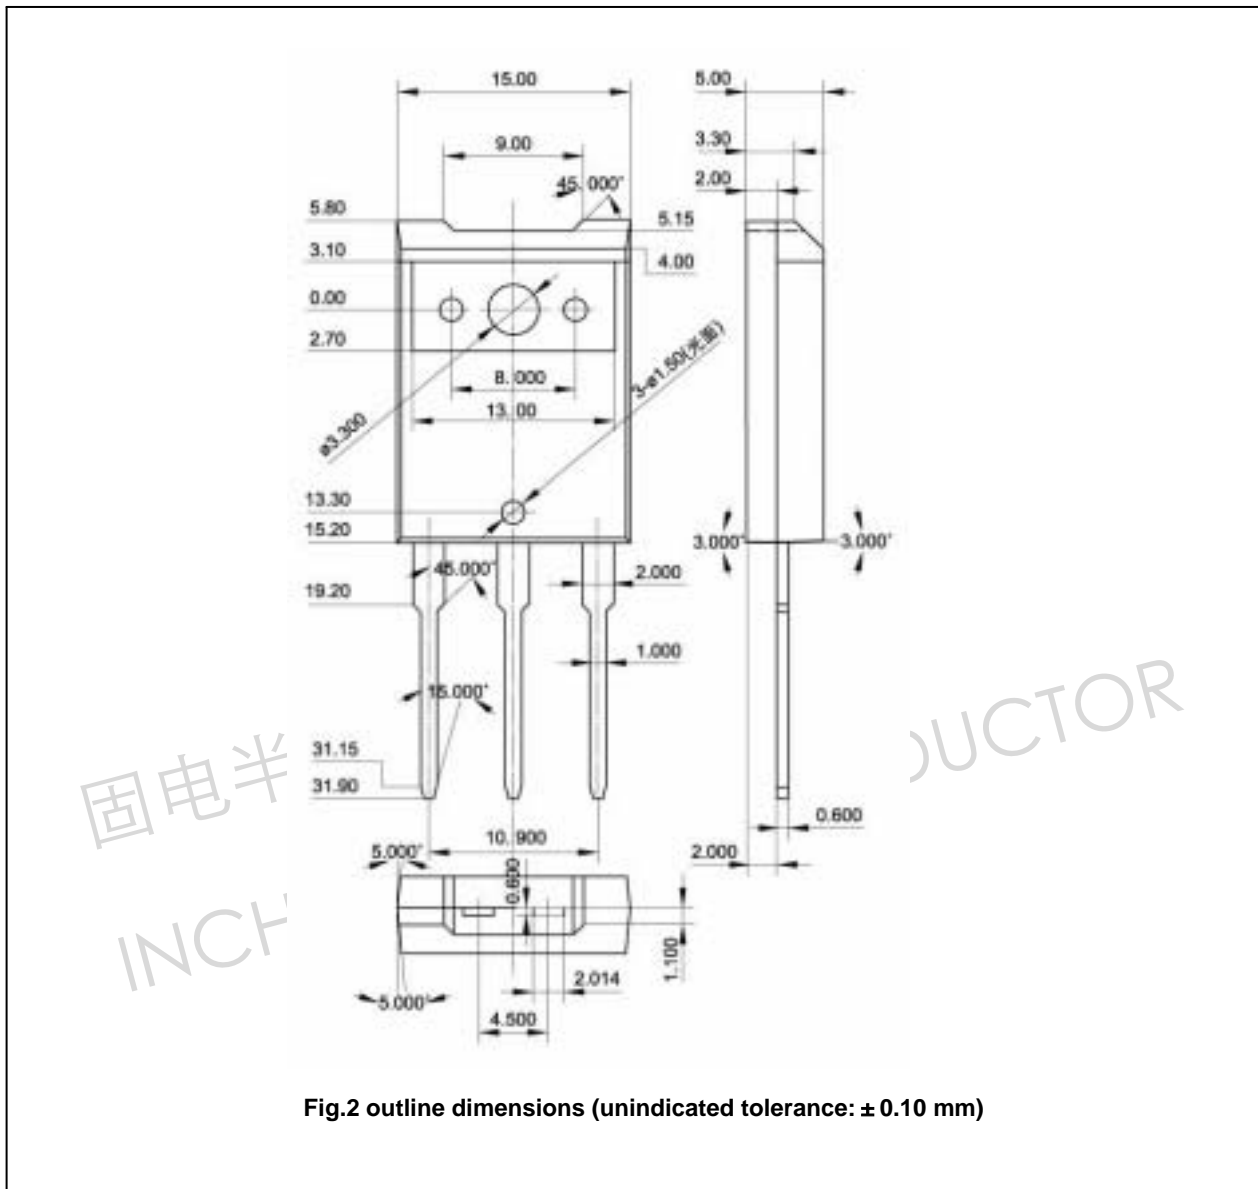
outline dimensions (unindicated tolerance:  $\pm 0.10$  mm)
